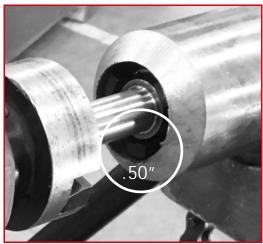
BG38 BOILER GUN INSTALLED IN WORKPIECE
